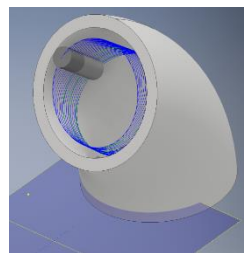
Hybrid 3D design of toroidal surface machined inside/outside.
